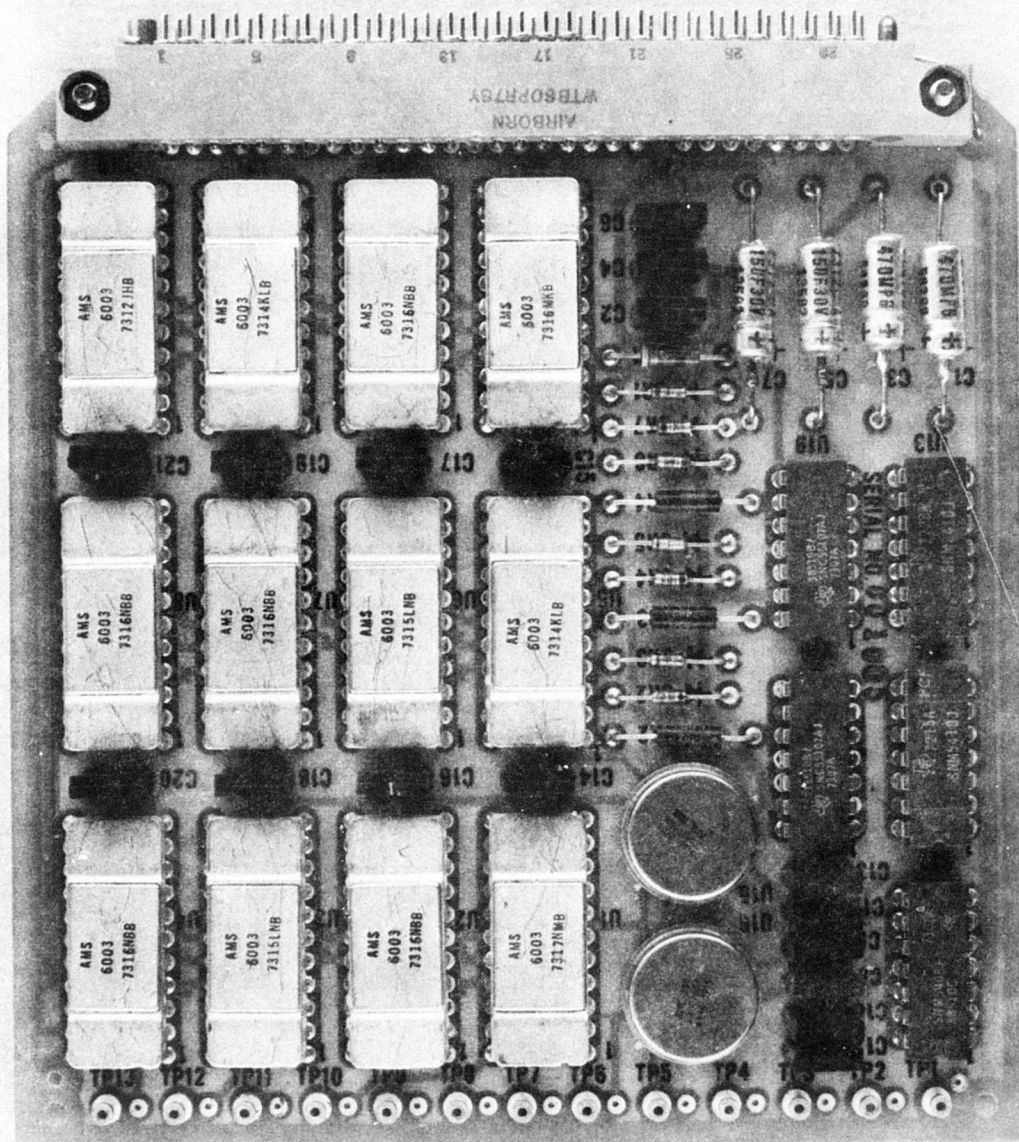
AICU MEMORY PRINTED CIRCUIT BOARD
